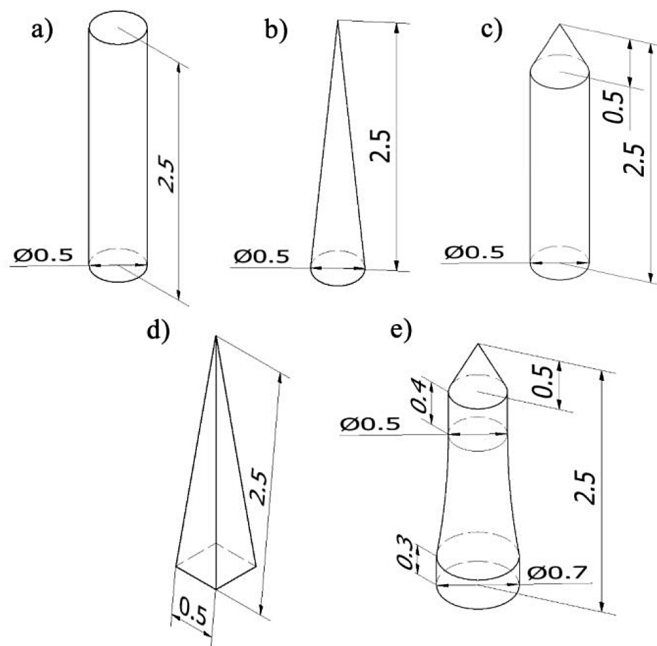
Types of microneedle geometry: a) cylinder, b) cone, c) cylinder with a cone, d) pyramid, e) cylinder with a cone and a flange at the base
